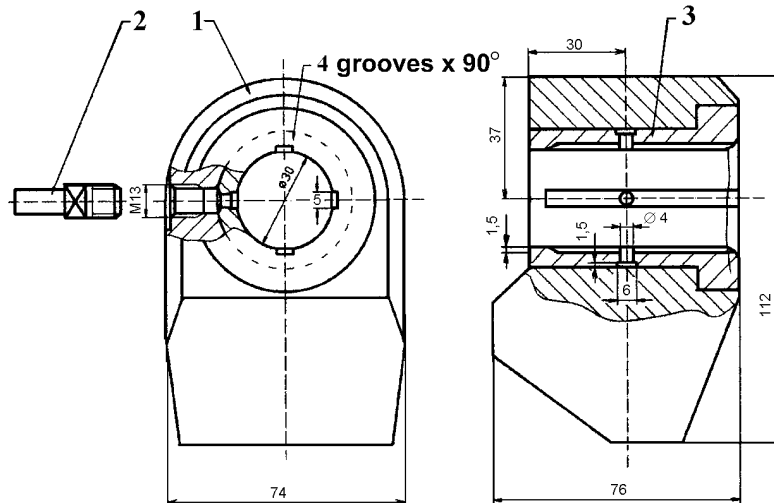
Modernized, lubricated holder for the tangential rotary tools of the RM 8 system (Bęben *et al.* 2001; Kotwica 2003, 2005): 1 – tool holder, 2 – delivery ferrule, 3 – sleeve
